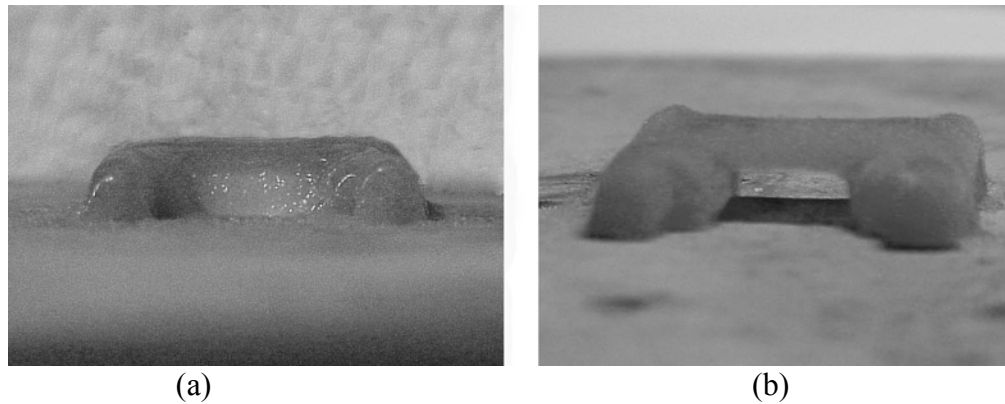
A fabricated ice part with a supported center section: (a) before support material removal and (b) after support material removal
